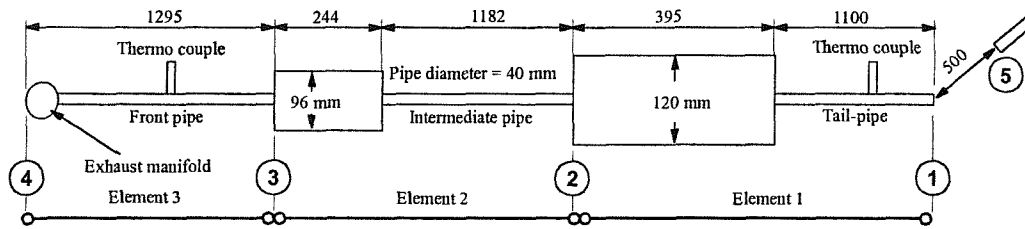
Exhaust system layout, displaying the geometric details of the three elements (all dimensions are in millimetres).
